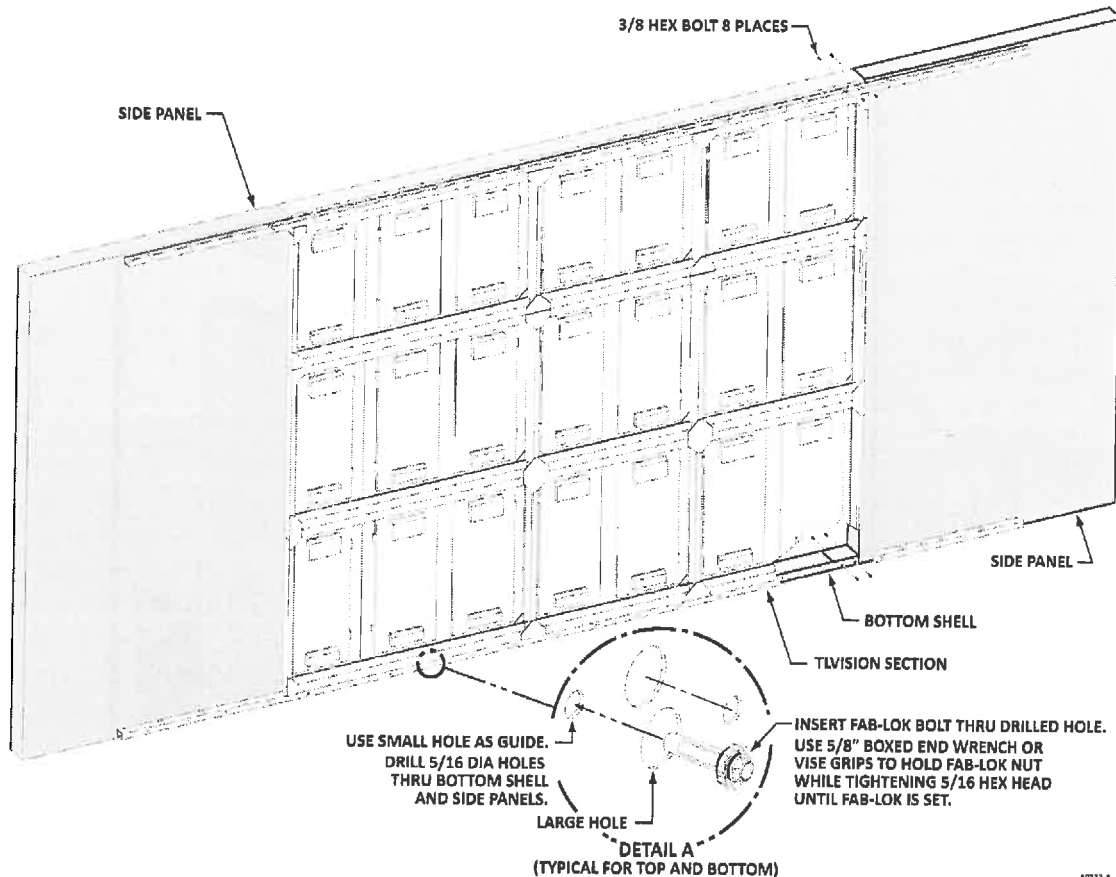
INSTALL SIDE PANELS TO TLVISION SECTION
